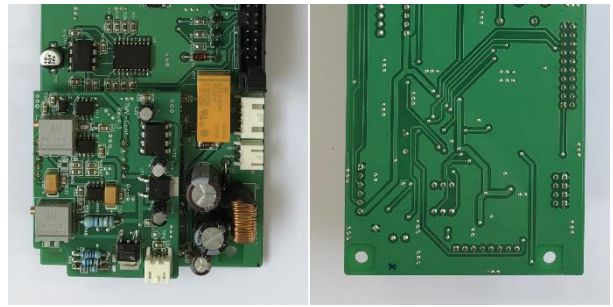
LED PCB to reconstruct. (a) front of PCB. (b) back of PCB
